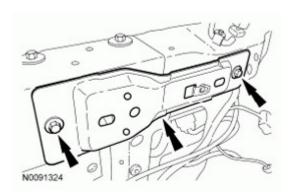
Locating Upper Radiator Support Plates And Bolts Courtesy of FORD MOTOR CO.
